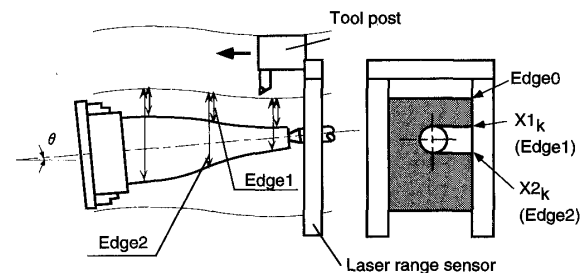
Measurement of machined workpiece by use of laser range sensor
